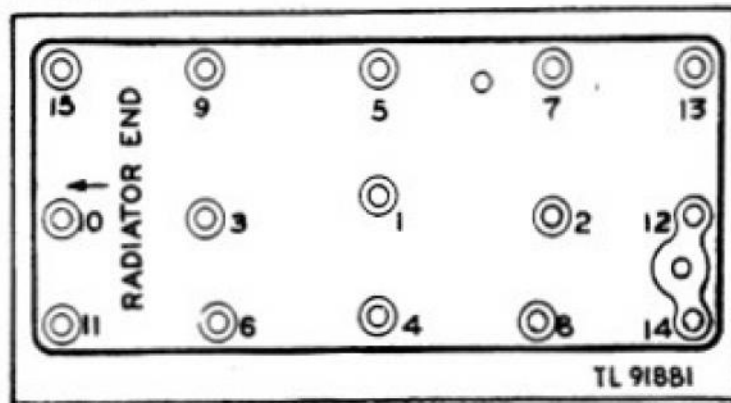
Power Units PE-95-(2) and PE-95-F, cylinder head tightening chart.
